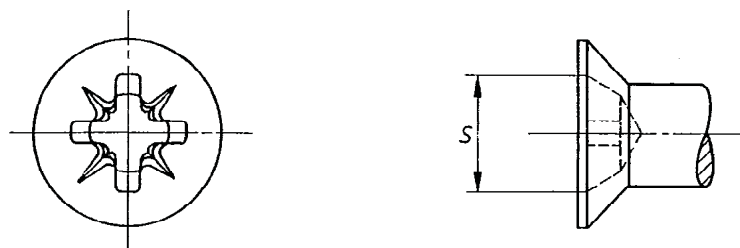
Recessed countersunk head machine screws: enlarged views of recess type Z
